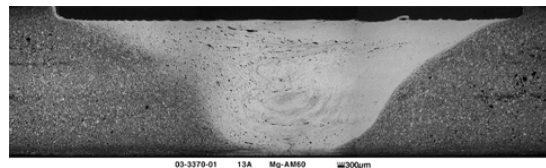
Transverse section of a friction stir weld of AM60B.
